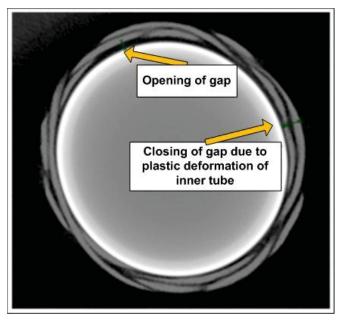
Post bend test tomography results of hybrid mock-up specimen SiC-2 showing the bending of the inner Zr-4 tube and the subsequent closing of the gap between the SiC-CMC sleeve and the Zr-4 tube.
